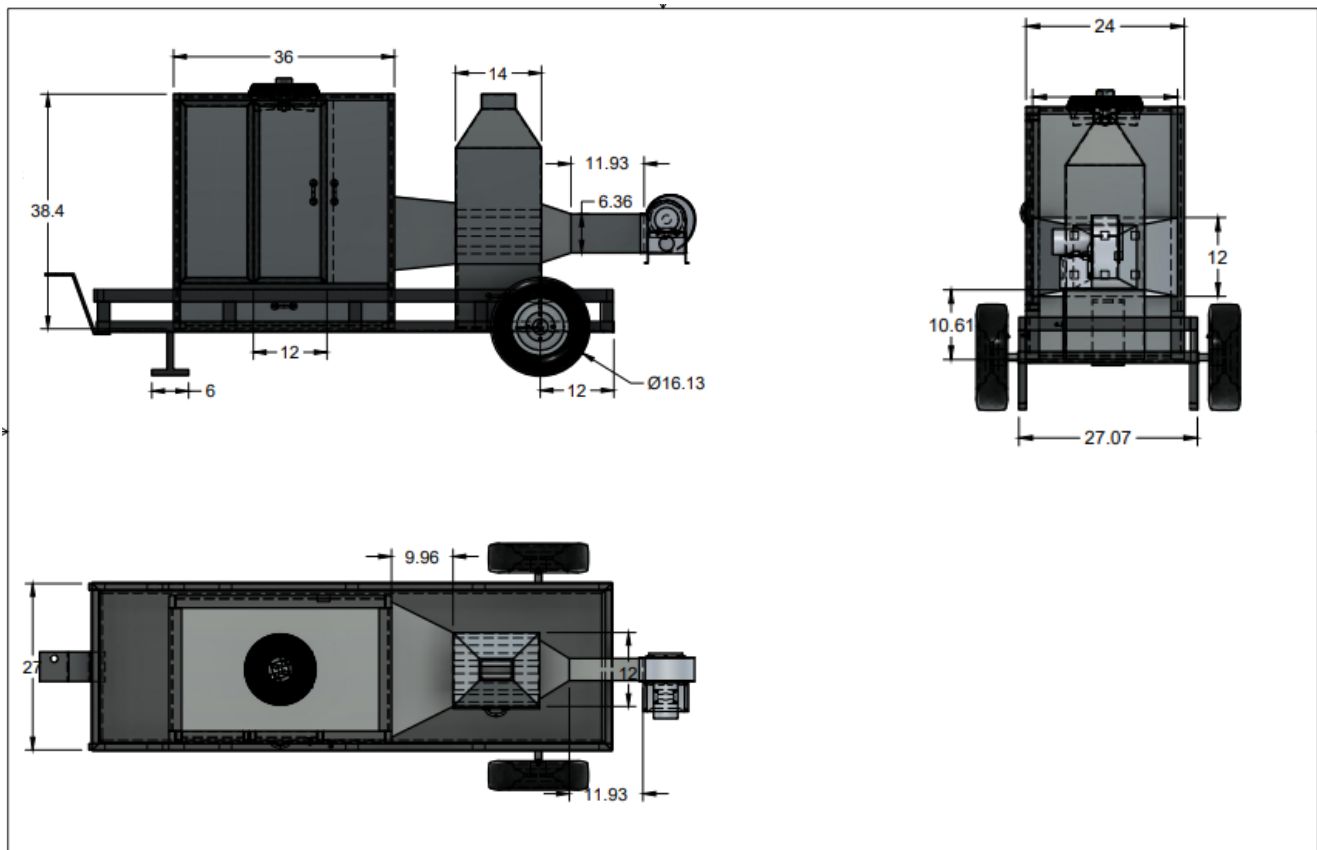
Orthographic view of the designed multipurpose cabinet dryer
